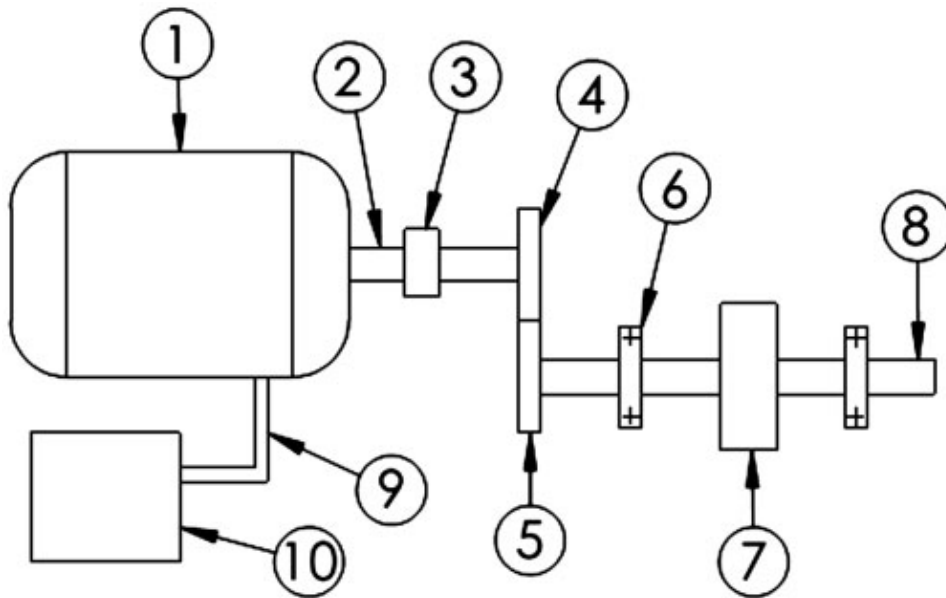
Gearmotor model: 1. Motor, 2. Rotor shaft, 3. Coupling, 4. Gear, 5. Gear, 6. Bearings, 7. Mechanical loading system, 8. Driven shaft, 9. Cable, 10. Power supply [1]
